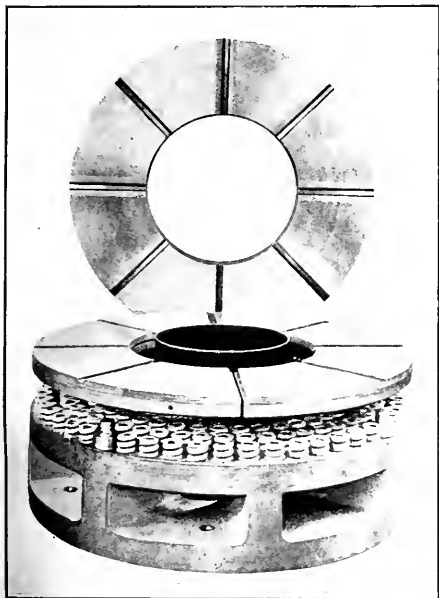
SPRING THRUST BEARING, FOR VERTICAL WATERWHEEL-DRIVEN GENERATOR, TO CARRY A LOAD OF 300,000 LB. AT 100 R. P. M.
